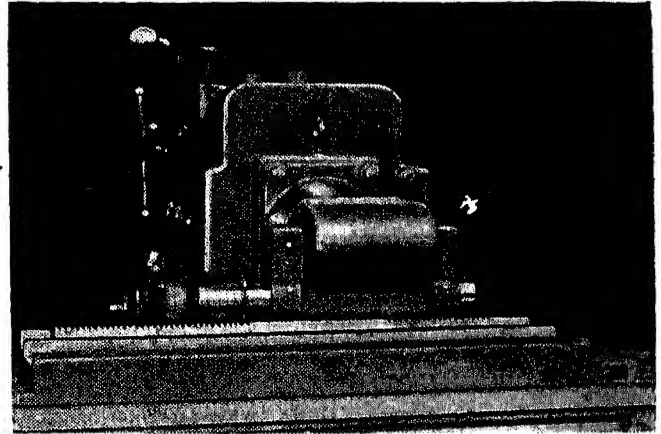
A rack milling attachment. (Courtesy Kearney and Trecker Corp.)
